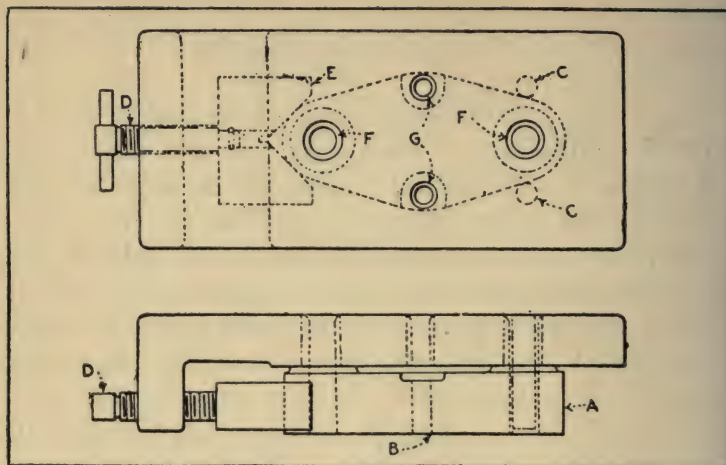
SET-ON JIG FOR SMALL PIECE OF WORK
